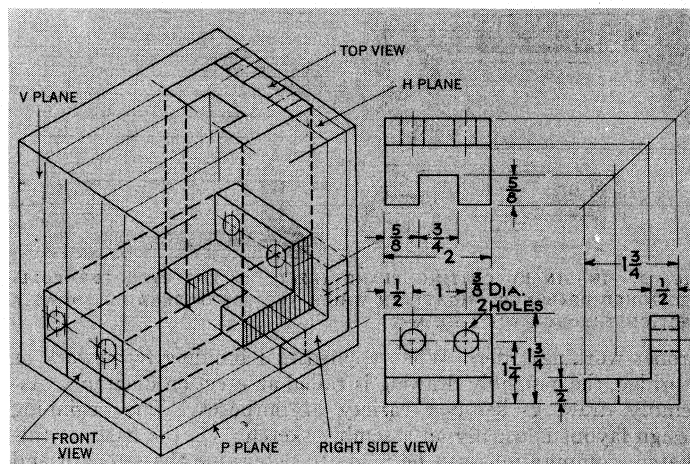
THEORETICAL METHOD (LEFT) OF PROJECTING A THIRD-QUADRANT, THREE-VIEW DRAWING AND (RIGHT) COMPLETED DRAWING WITH UNIDIRECTIONAL DIMENSIONING
